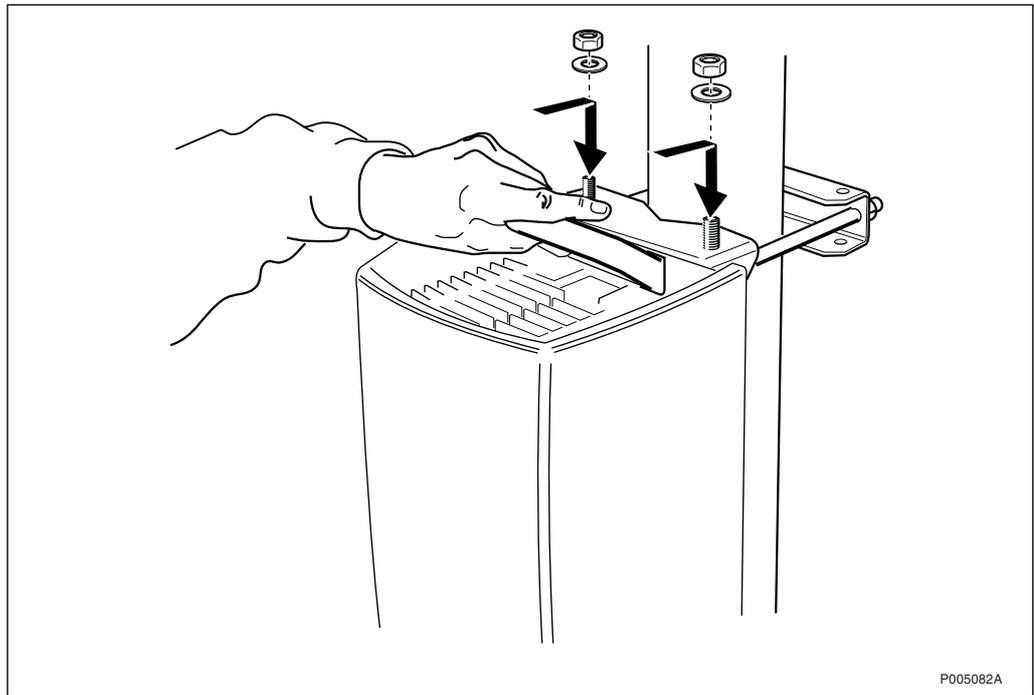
The CEU hooked on to the stud bolts on the upper mounting fixture
